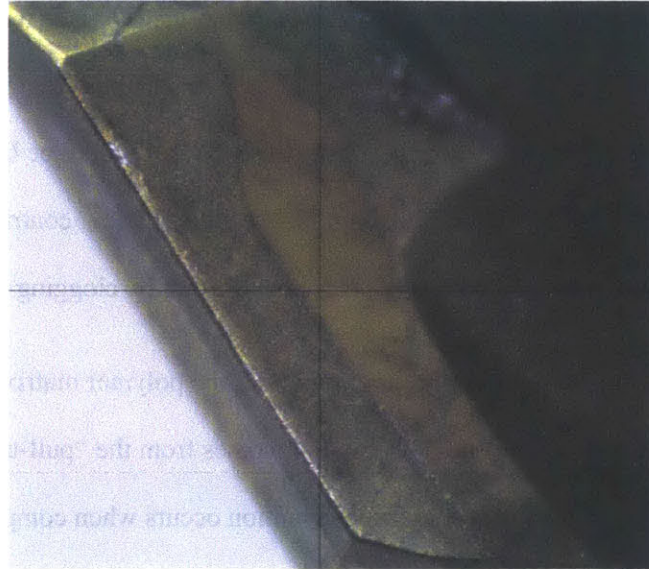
Close-up of Polycrystalline Diamond Coated Cutting Tool
